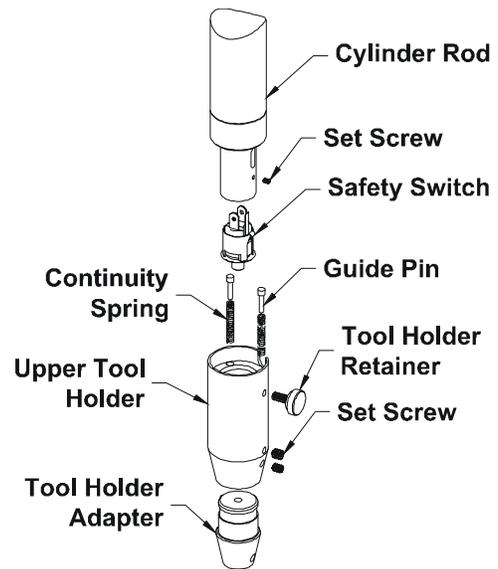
The Safety Switch is inside the Upper Tool Holder.
